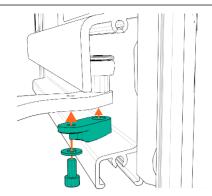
Mount lever block to lock guide roller in door rail (cross section)
